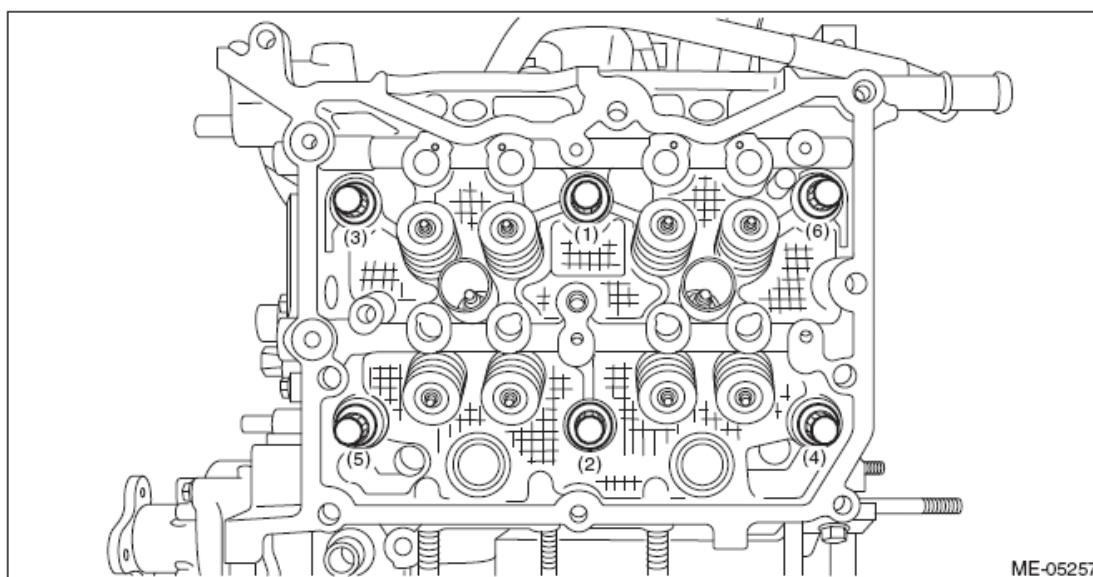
Identifying Cylinder Head Bolts Tightening Sequence
